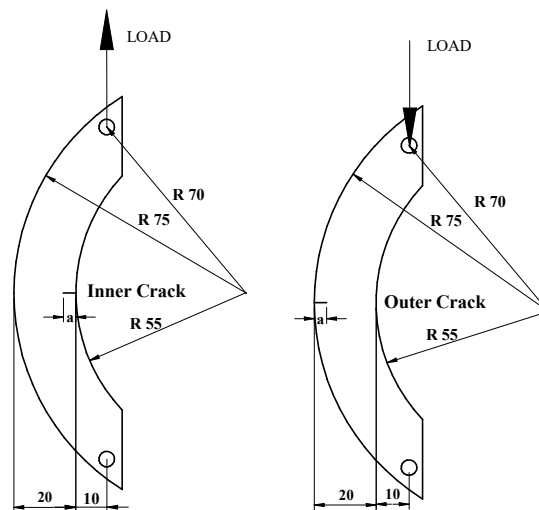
Arc Shaped Tension Specimen with Surface Cracks
